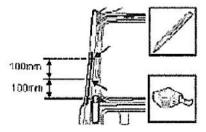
Mounting bracket drilling dimensions - when fitted with VPK
